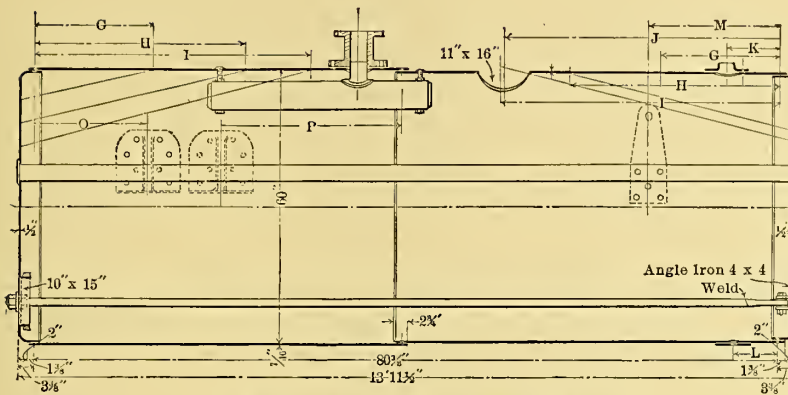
SECTIONAL VIEW OF COMPLETED BOILER.
